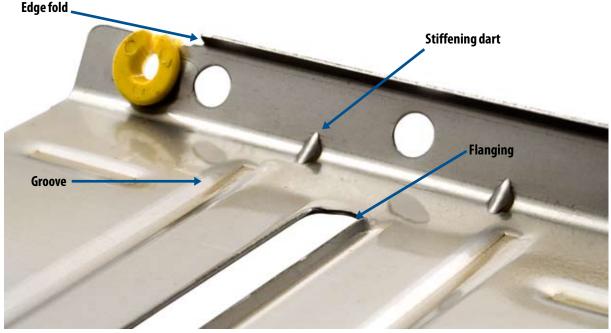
Examples of local geometrical stiffeners on a lump bar in Docol 1300M.
